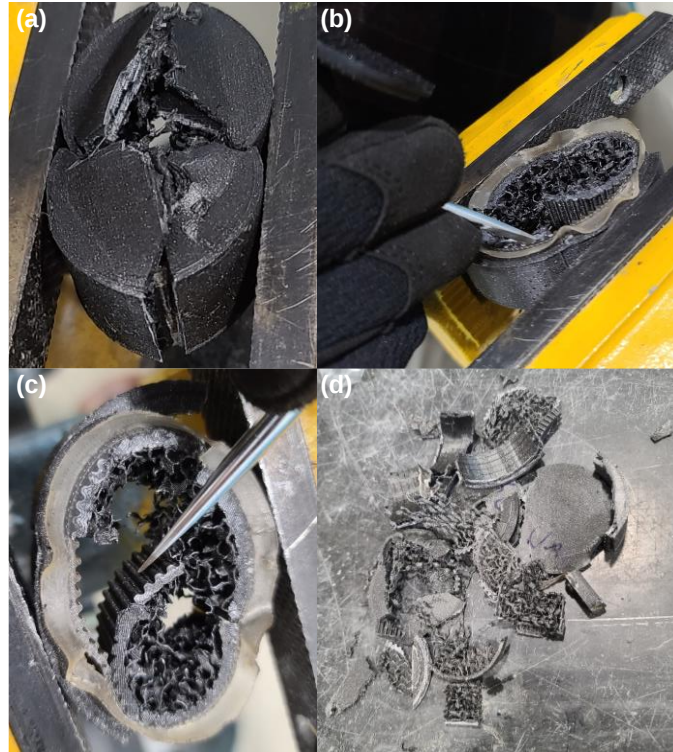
Mechanical removal of a five-belt part from a PLA mold. (a) PLA mold placed in a vise, (b) removal of the PLA mold, (c) peeling of the PLA mold away from the toothed belt, and (d) PLA mold pieces after removal.
